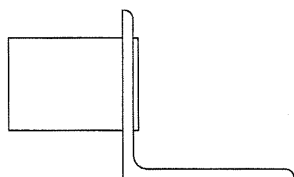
90°-Bracket and Coupling (P/N 263363)
